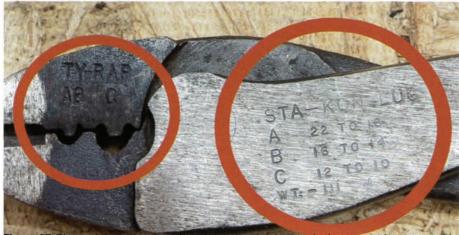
The author's crimping pilers have the terminal and wire gauge sizes stamped on the side of the tool.
